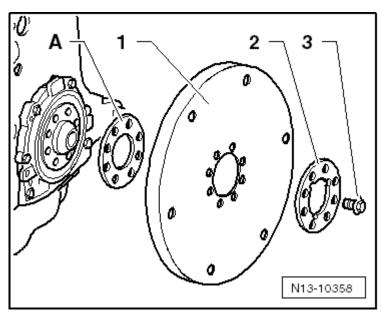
Identifying Shim -A- And Bolts Courtesy of AUDI OF AMERICA, LLC
